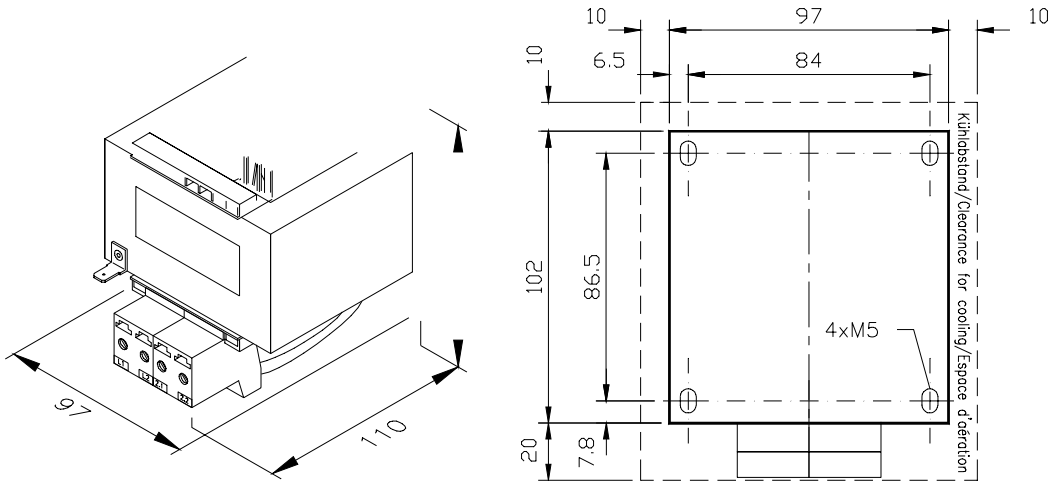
Outline drawings and mounting OPTION L415/2
